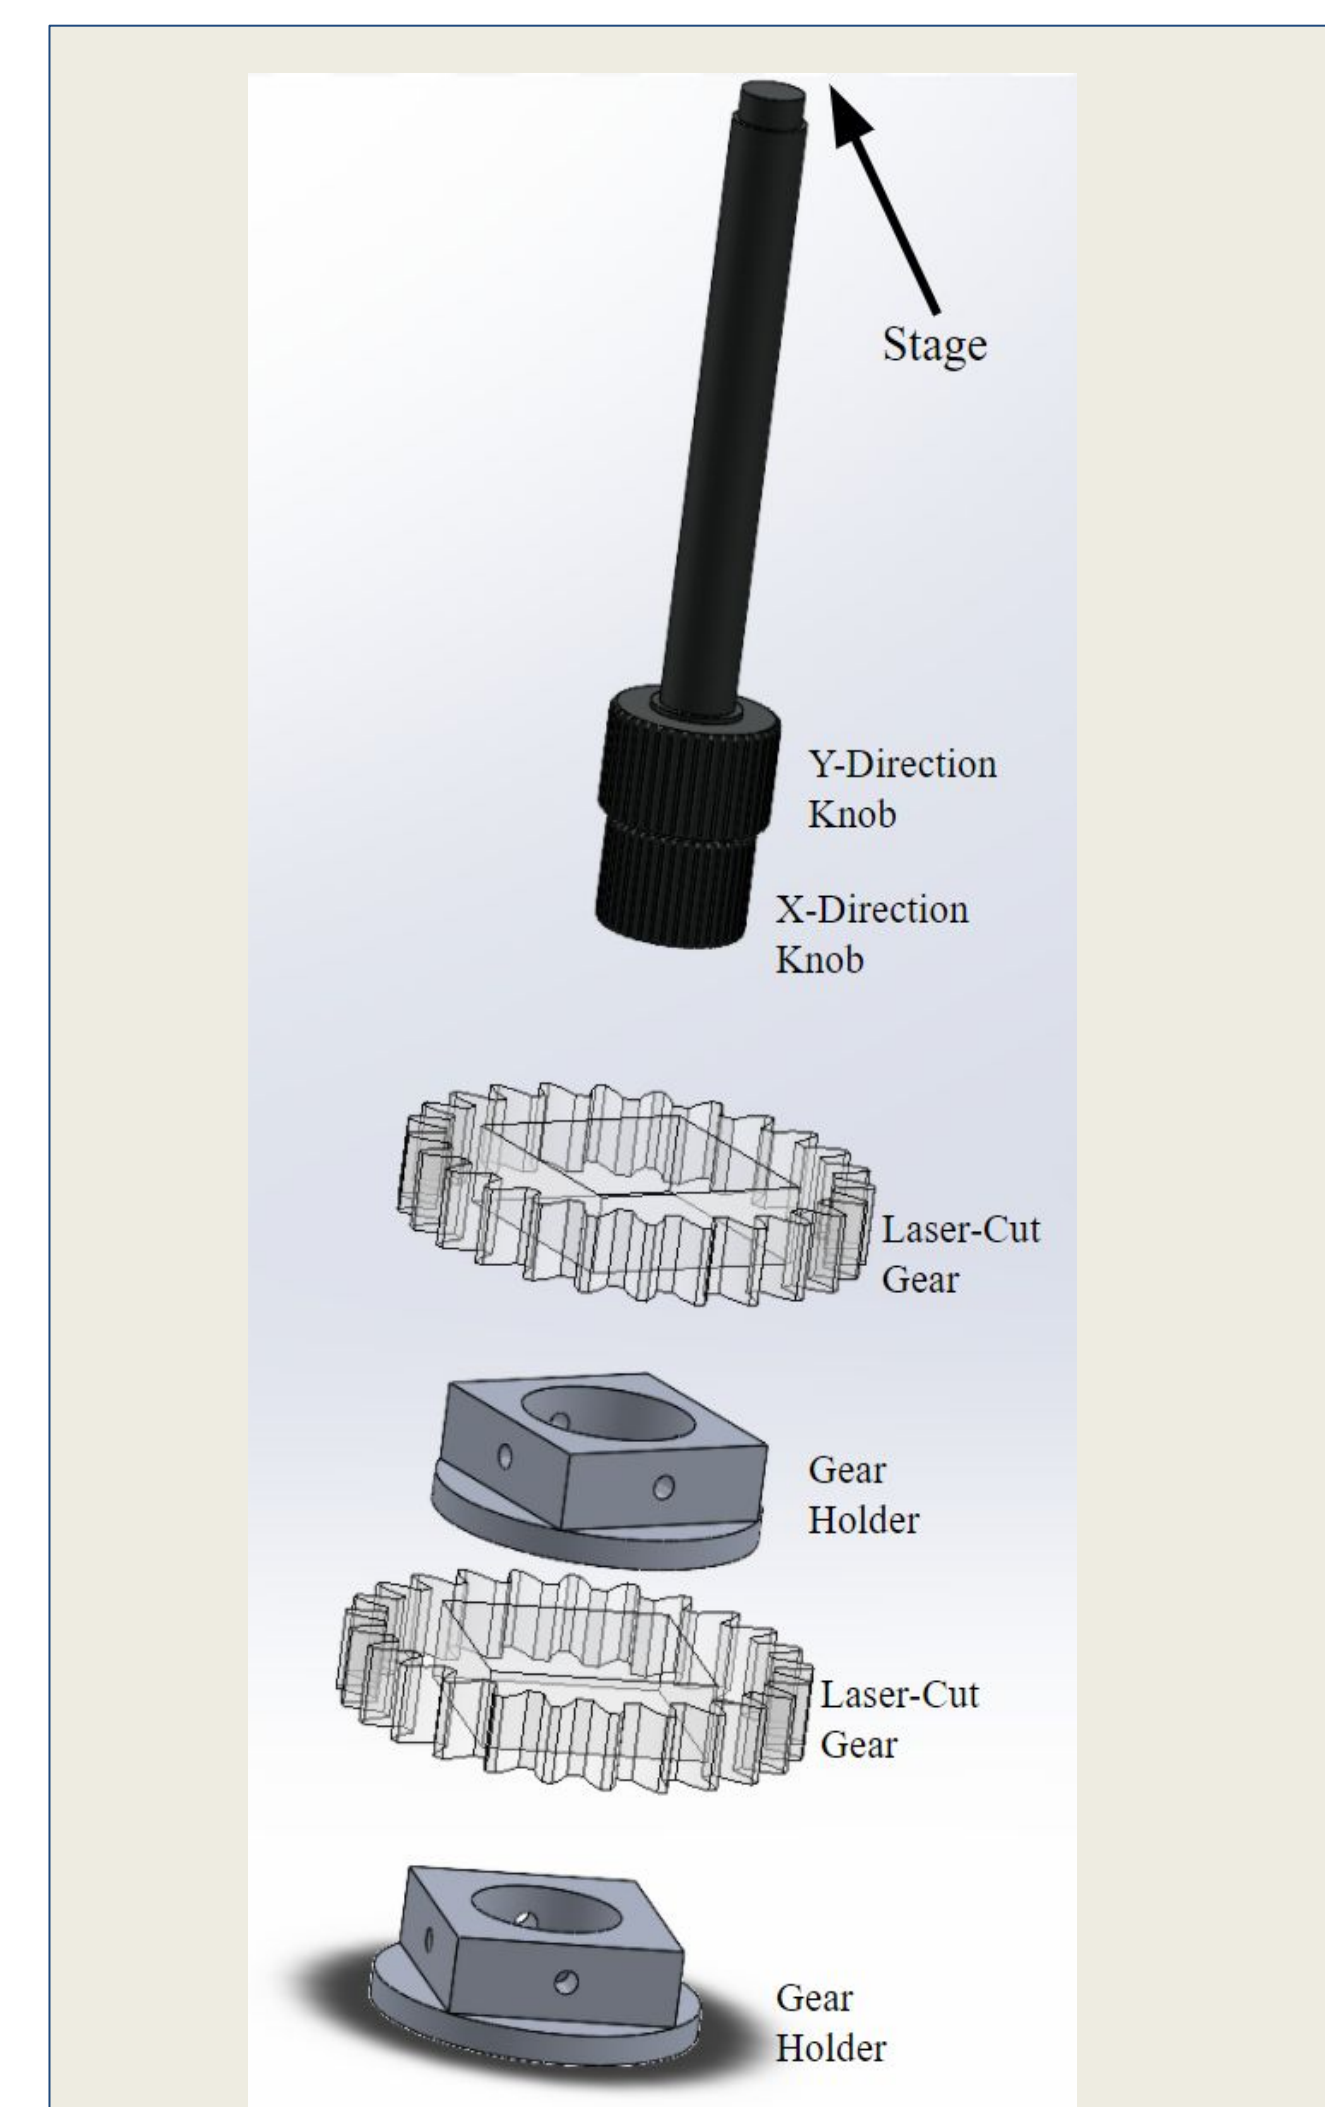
The Gear-knob attachment. Set screws fixed a machine holder to each of the two manual knobs. Each holder held a laser-cut gear with a diameter:teeth ratio of 88 mm/32 teeth.
